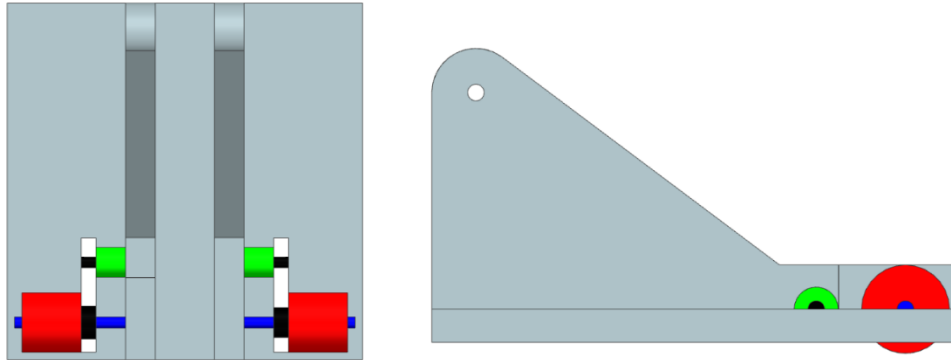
Belt/Chain Drive Visual – Top and Side View
